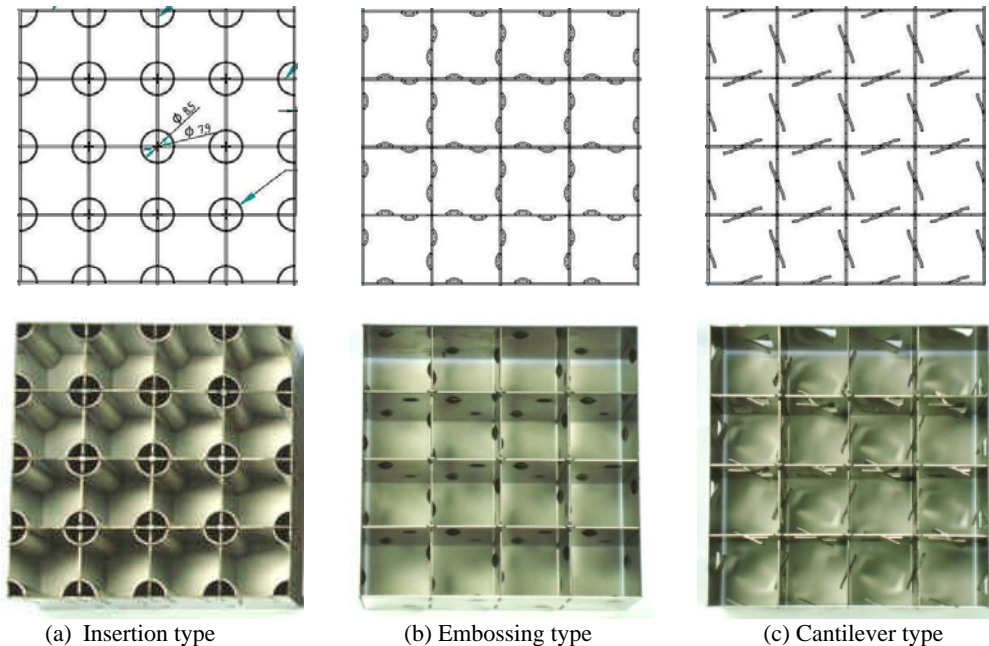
Candidate designs of a spacer grid for a dual cooled fuel and fabricated mockup specimens
